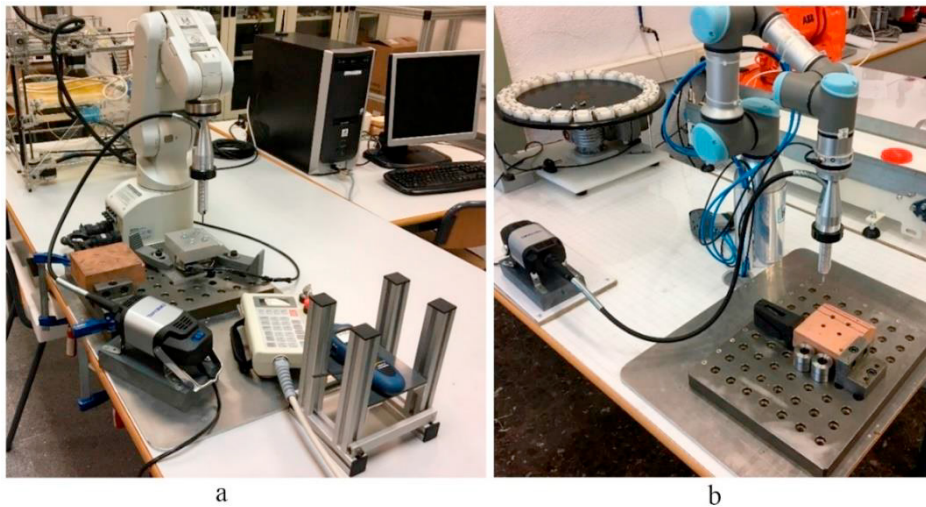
(a) Machining cell with Mitsubishi robot; (b) Machining cell with UR3 robot.
